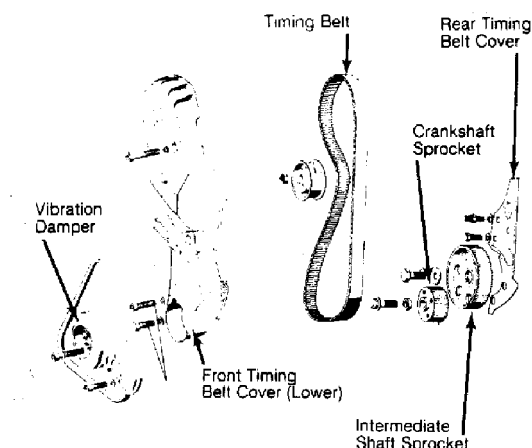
Scirocco 16-Valve Timing Belt Cover
